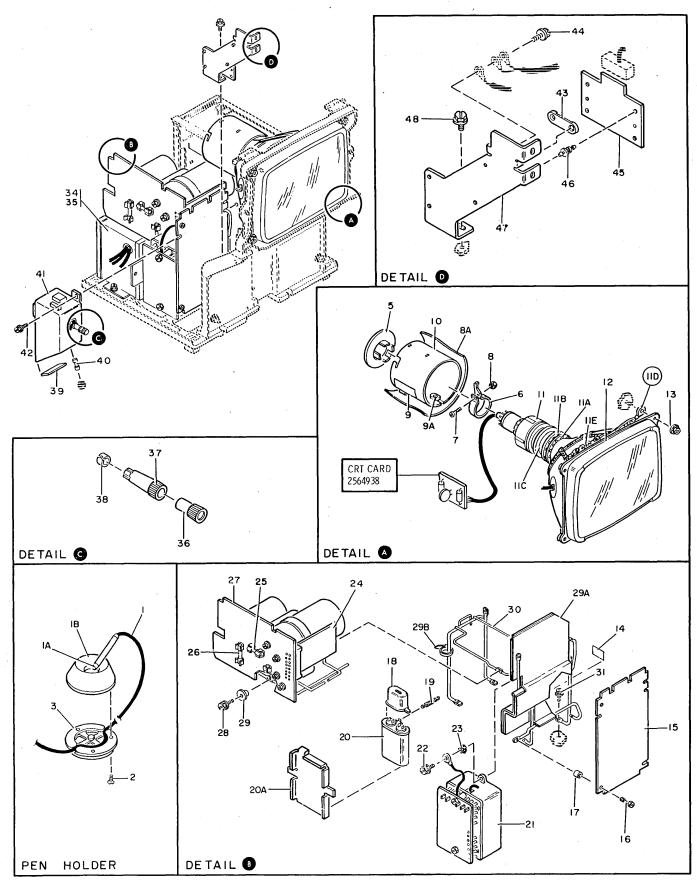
3277 M1 Final Assembly. Sheet 1 of 2. Index Nos. 1-48.
